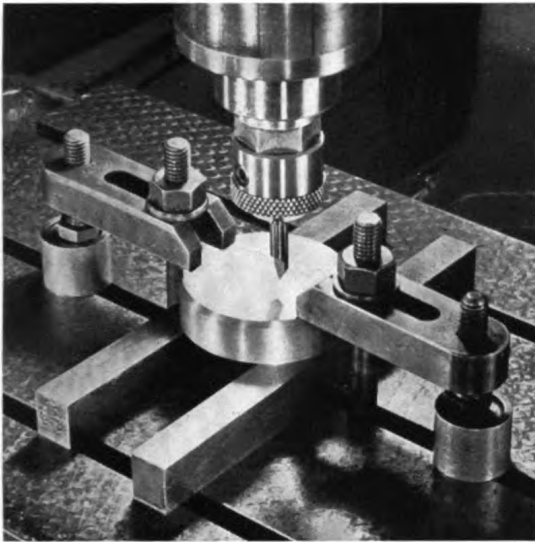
Special spotting tools provide high initial locational accuracy, important where hole is not to be finished by single-point boring.
